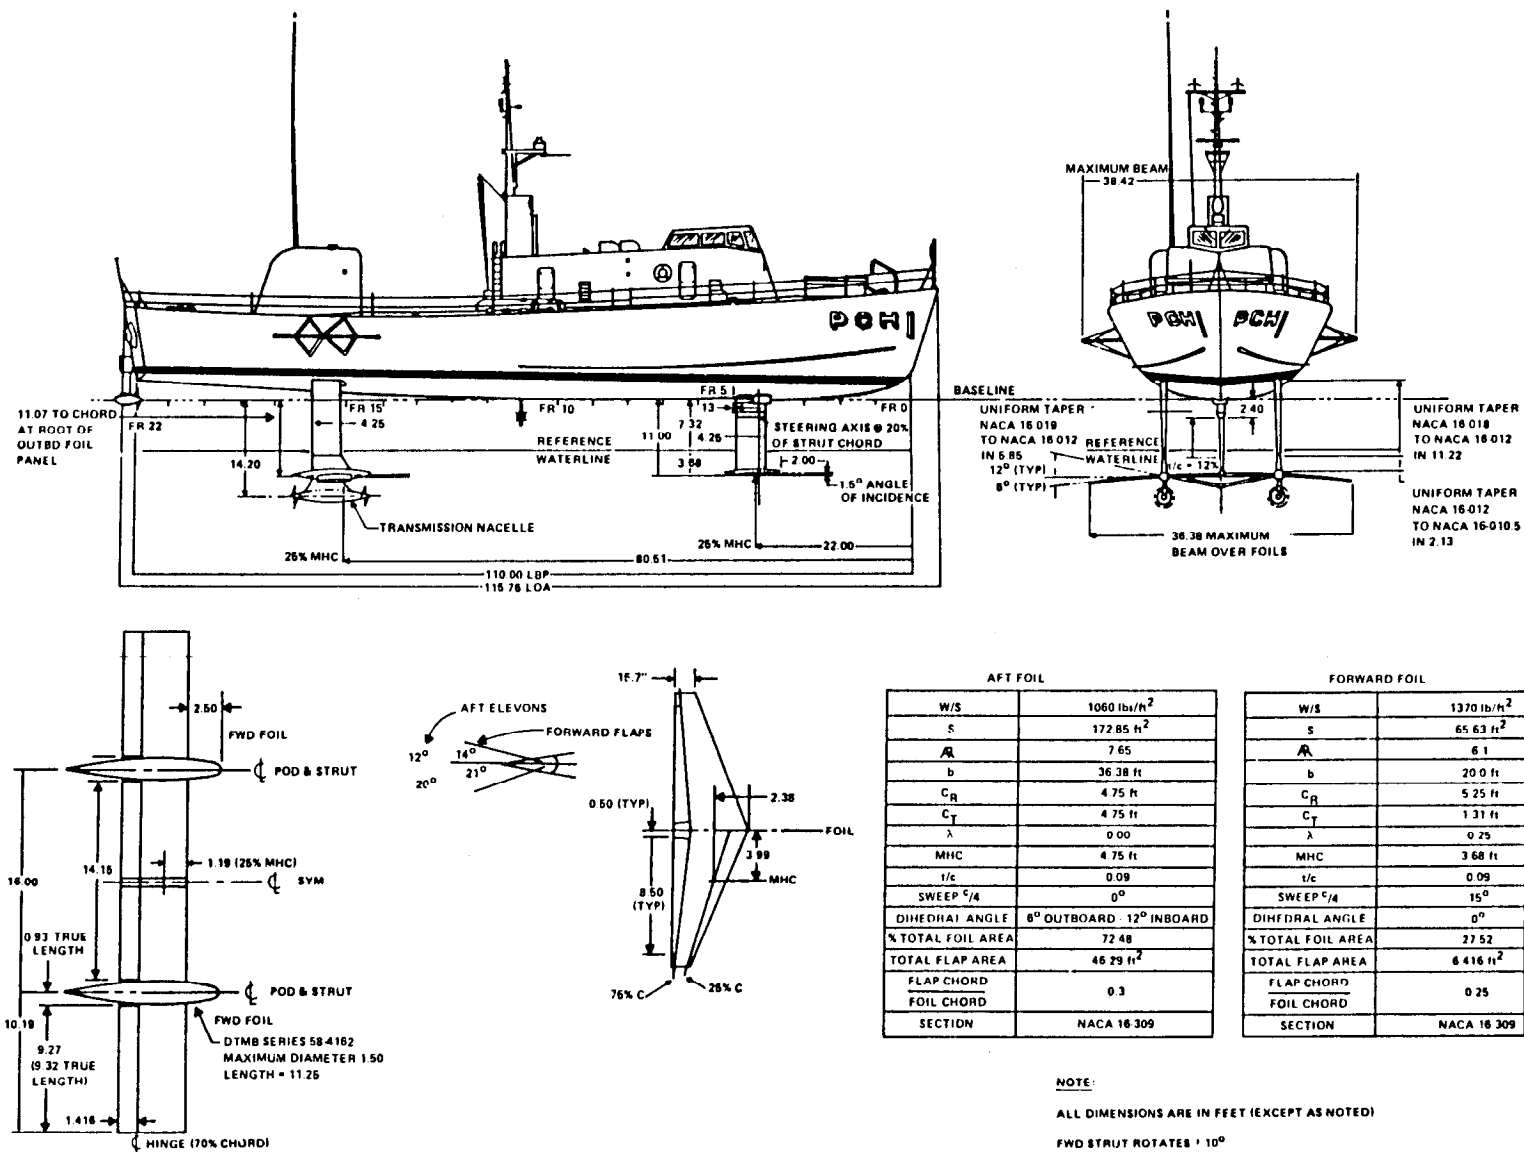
PCH 1 MOD 1 Principal Dimensions and Foil System Arrangement
